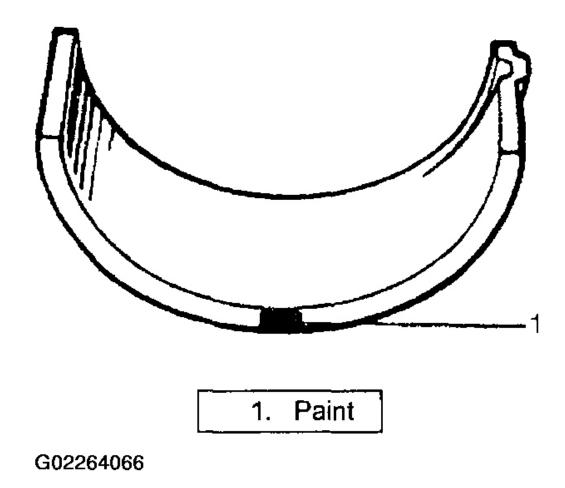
Locating Connecting Rod Bearing Paint Mark Courtesy of SUZUKI OF AMERICA CORP.
